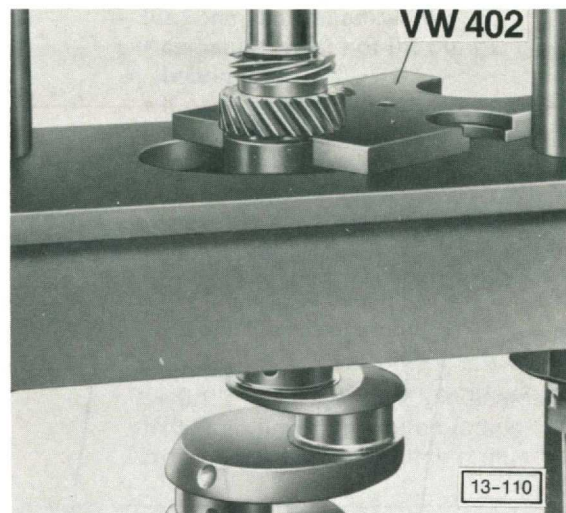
Distributor drive gear/crankshaft timing gear, removing
